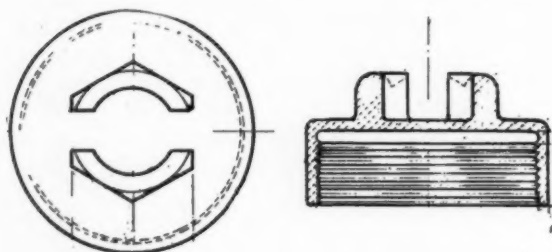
Plan and sectional views of tank filler cap, illustrating special nut.
